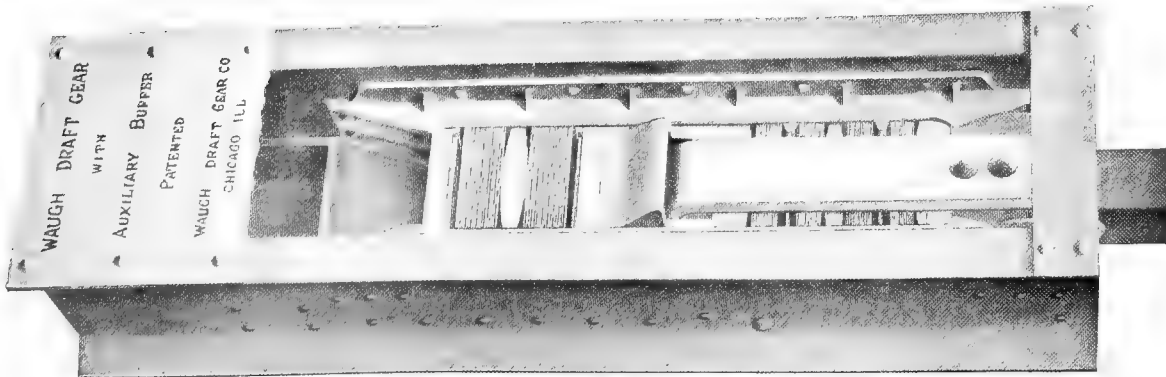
Waugh Draft Gear with Auxiliary Buffer.
